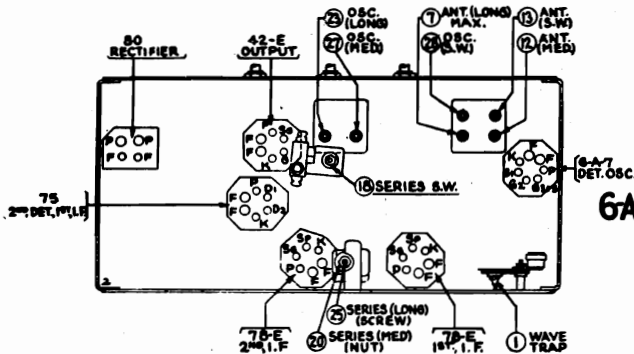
View of Tube Sockets and Compensating Condensers underneath Chassis.
